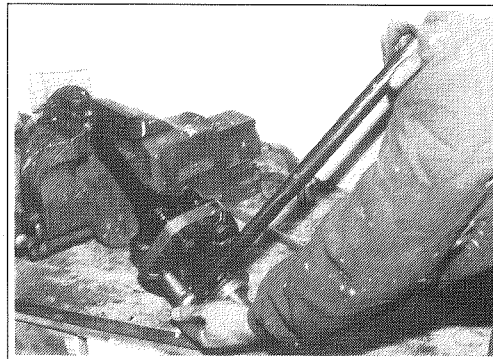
and all six bolts torqued to 65-70 lbft.
